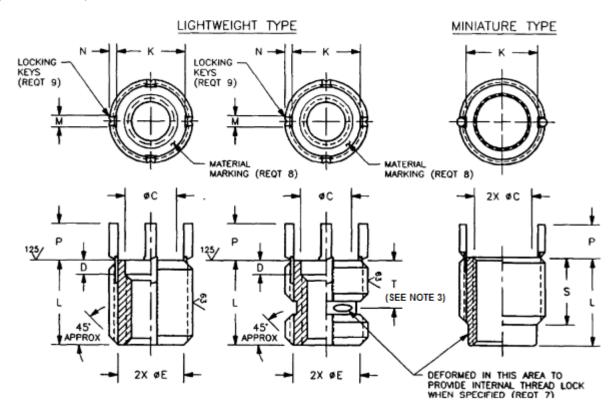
INSERT, COURSE INTERNAL THREADS.
